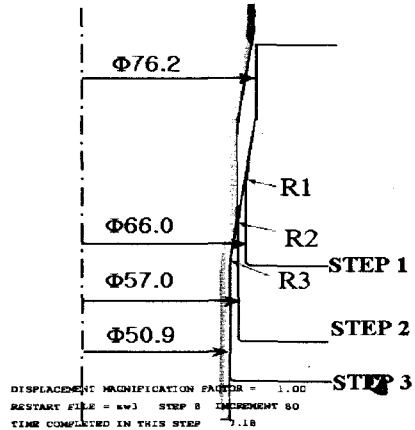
Die geometry of three-step sinking process and deformed workpiece at the step 3
